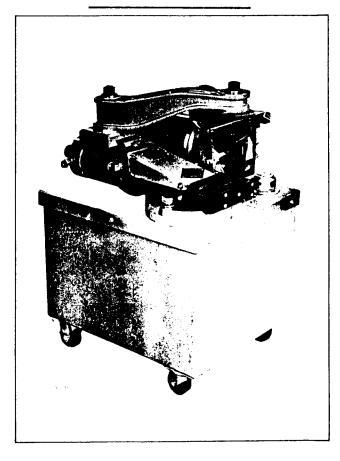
Tracer Slide Assembly Installed on Top of Hydraulic Power Unit for Shipping or Storage
